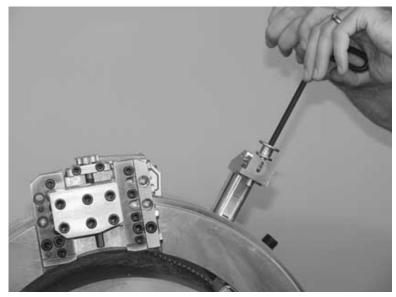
The trip assembly is shown with 2 extension blocks, corresponding to the slides in the "high" position.
